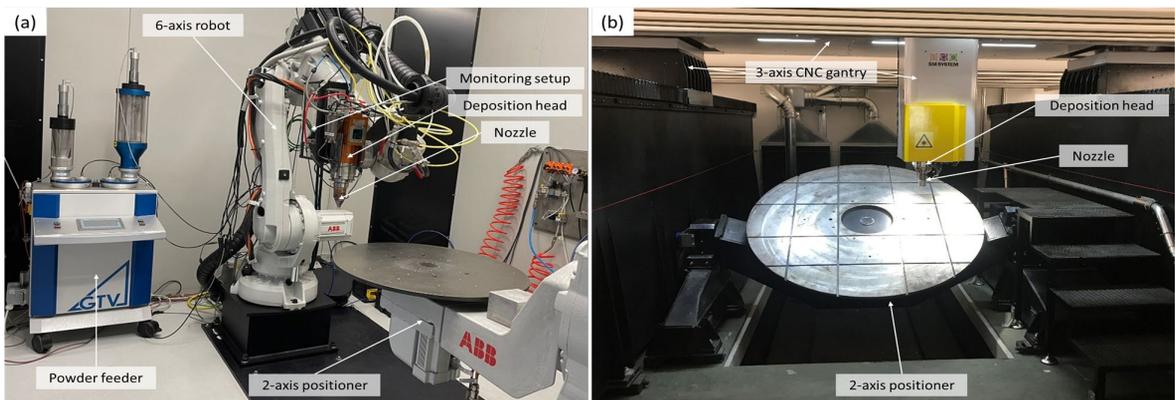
The two DED-LB machines used throughout this study: (a) articulated robot, and (b) CNC gantry.
